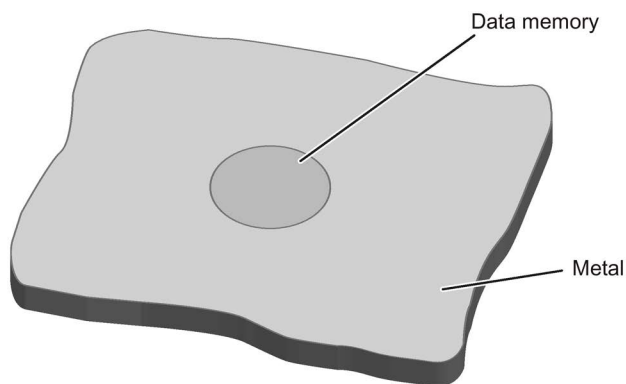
Mounting of MDS D421/D521/E623 in metal
